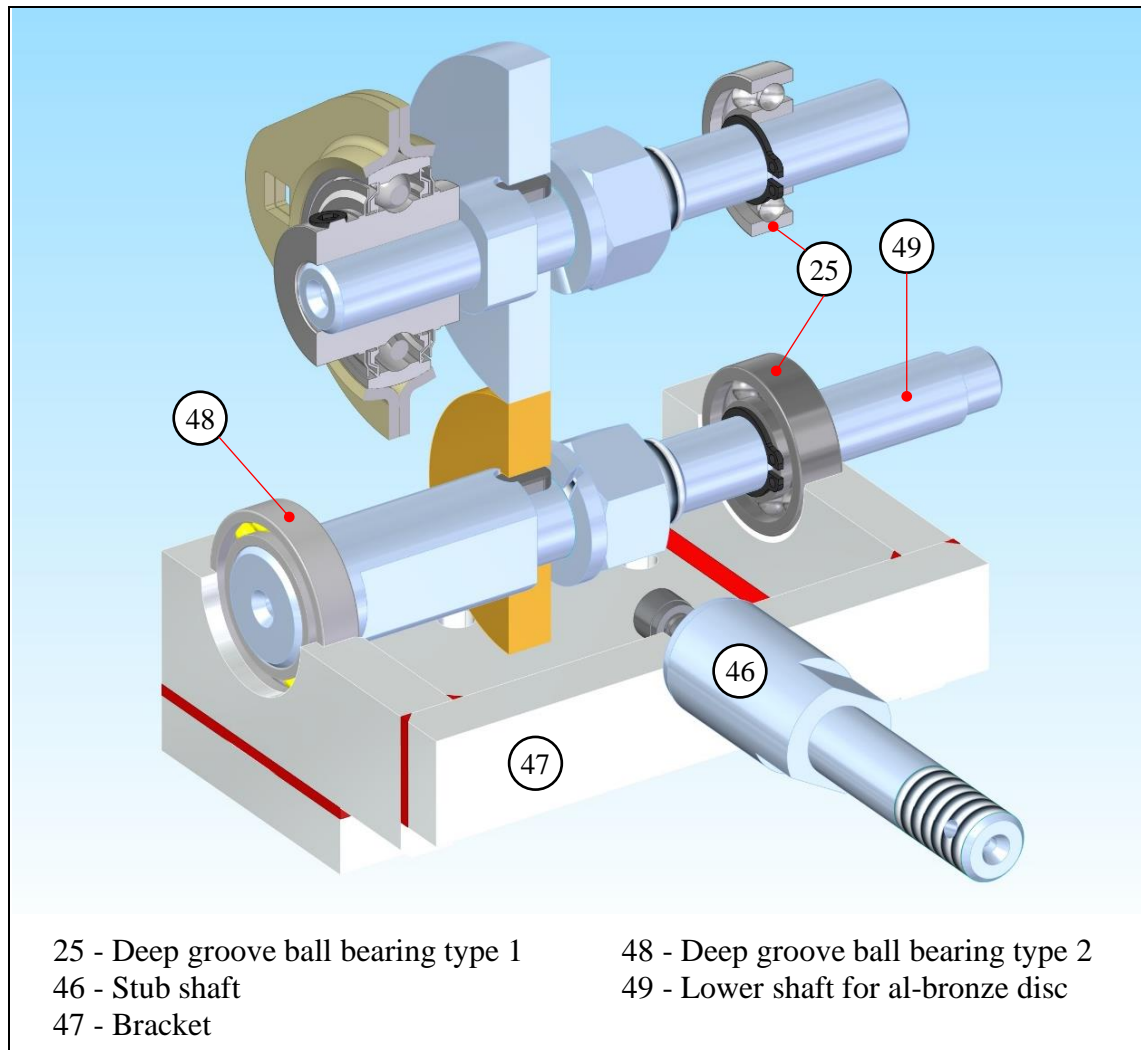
Sectioned CAD image of disc and shaft subassemblies in longitudinal vibration configuration.
